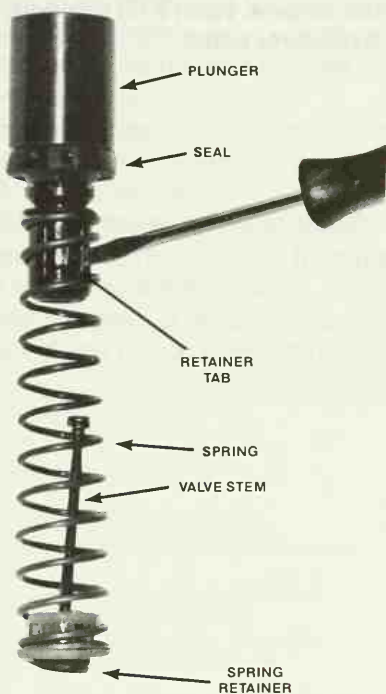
Removing spring and stem from a clutch cylinder plunger. (American Motors Corporation)
